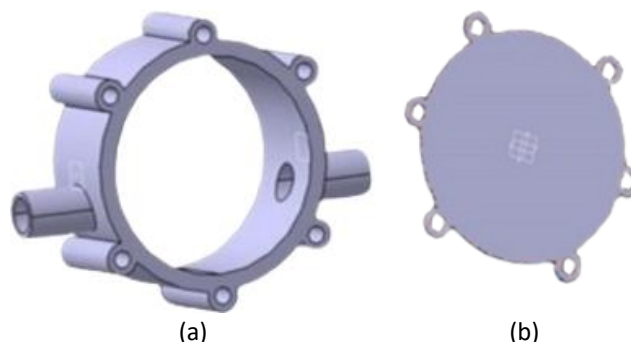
3D drawing of a (a) body casing (b) top casing
